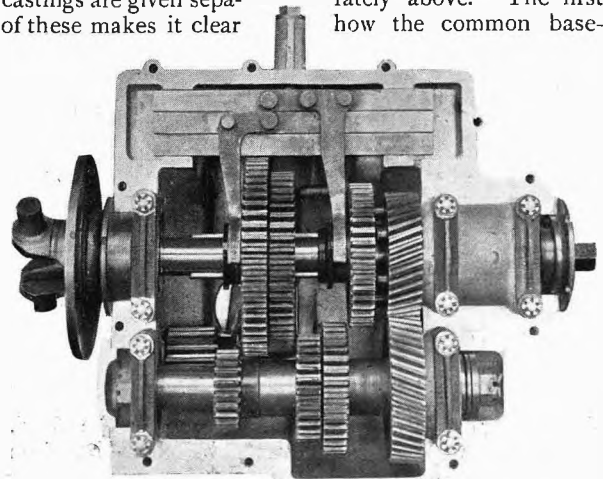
Helical gear-wheels for the lay-shaft, and disconnected idle pinions for the reversing gear, are features of the four-speed Arrol-Johnston gear-box.
